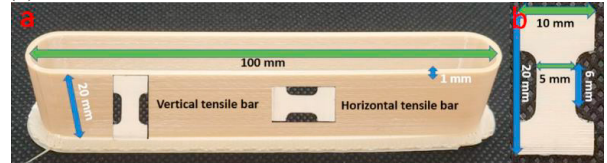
(a) Single wall rectangular box (5 samples each set); (b) Machined tensile bar.
